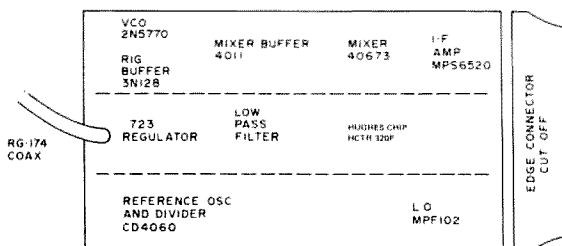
Single board synthesizer layout using Radio Shack breadboard and Hughes synthesizer chip.
